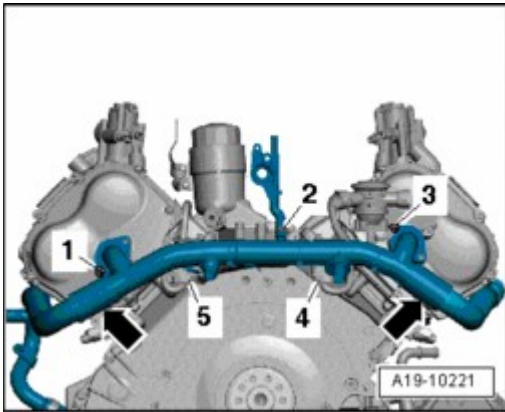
Identifying Bolts, Coolant Hose, Electrical Connectors & Heat Insulation Sleeves
